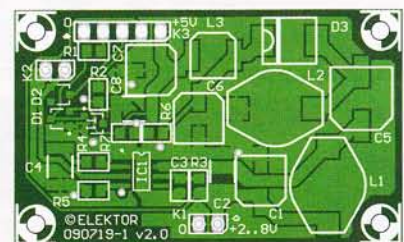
The printed circuit board is entirely populated with surface-mount devices. Because of the high temperatures used in reflow soldering with lead-free solder C2, C4, C8 and the headers are fitted manually.
